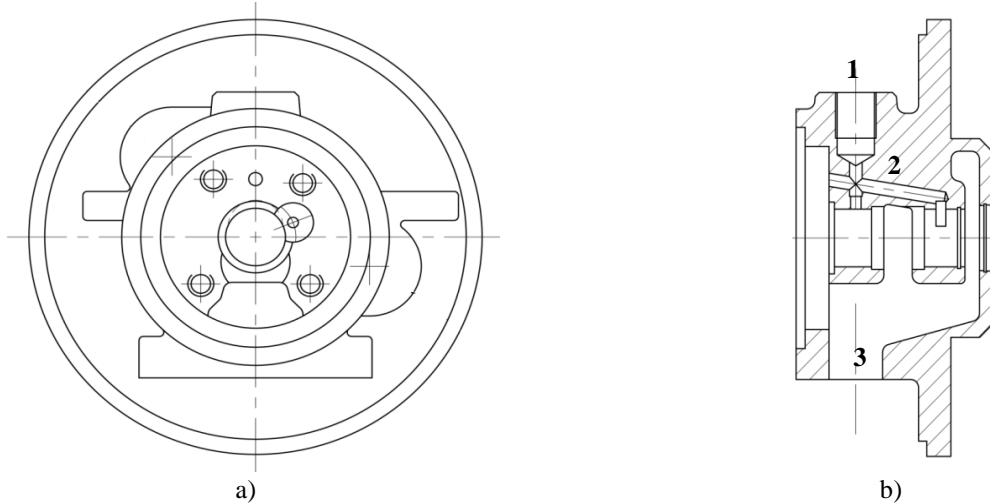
Garrett turbocharger center housing 1749V: a) general view, b) cross-sections: 1-flow of oil, 2-channel hollow oil, 3-drain oil [1]
